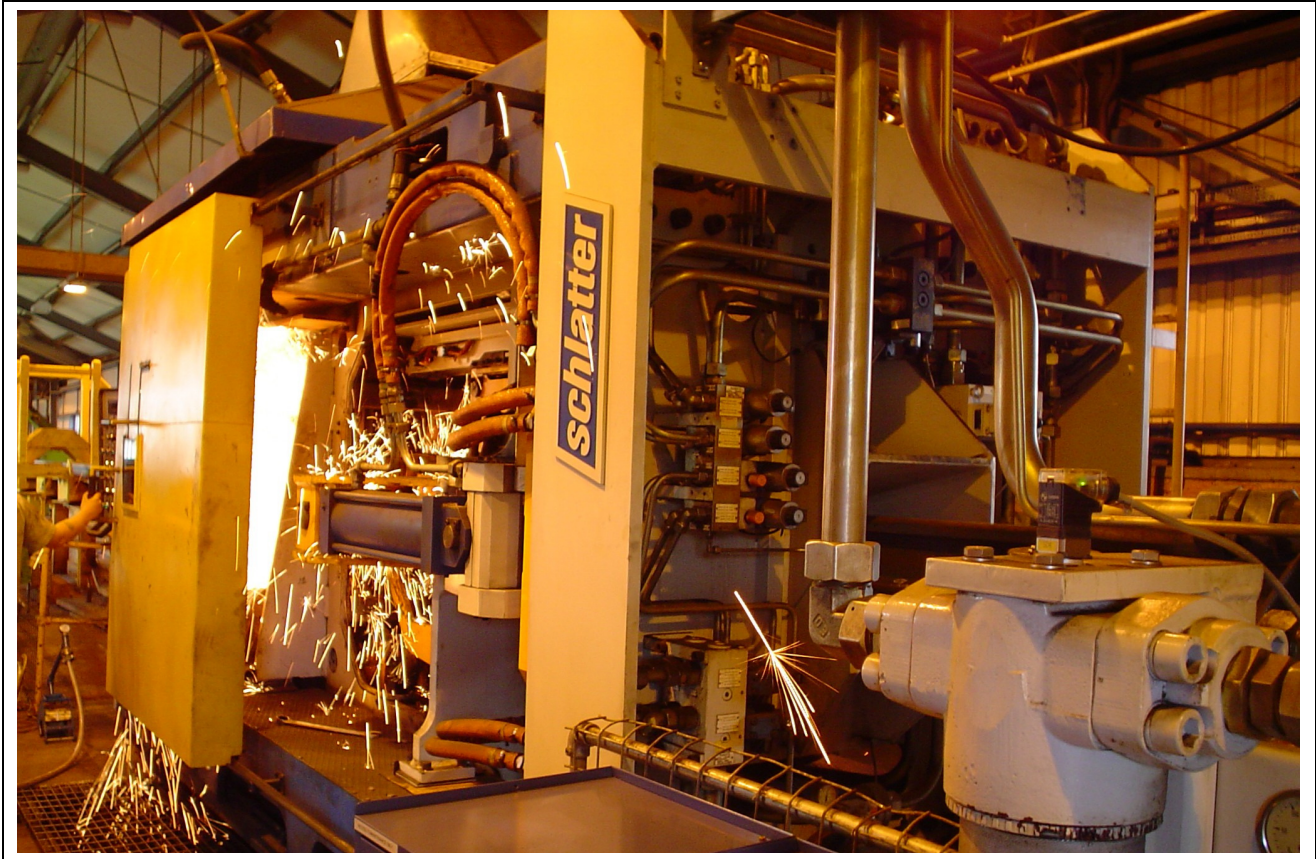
Schlatter GAAS 80 Flash Butt Welding Machine
